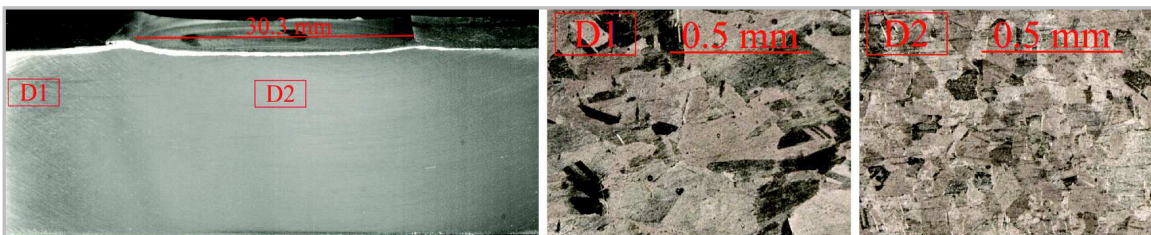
Cross-section polish of the weld and etchings of base material and stir zone (5%-HNO₃, 30 Sec)
